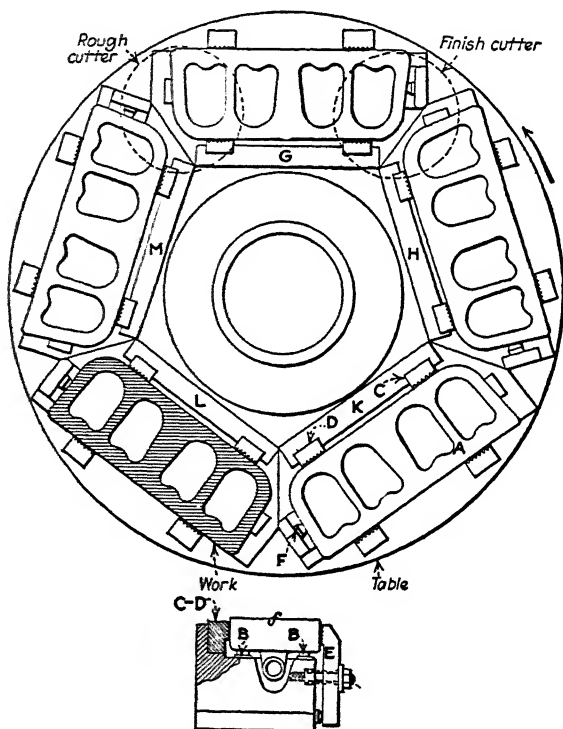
Continuous Milling Fixture for Cylinder Heads
